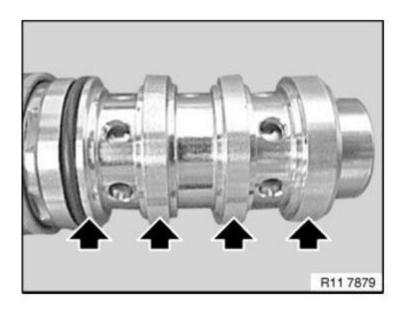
Locating Solenoid Valve Housing Surface Courtesy of BMW OF NORTH AMERICA, INC.
